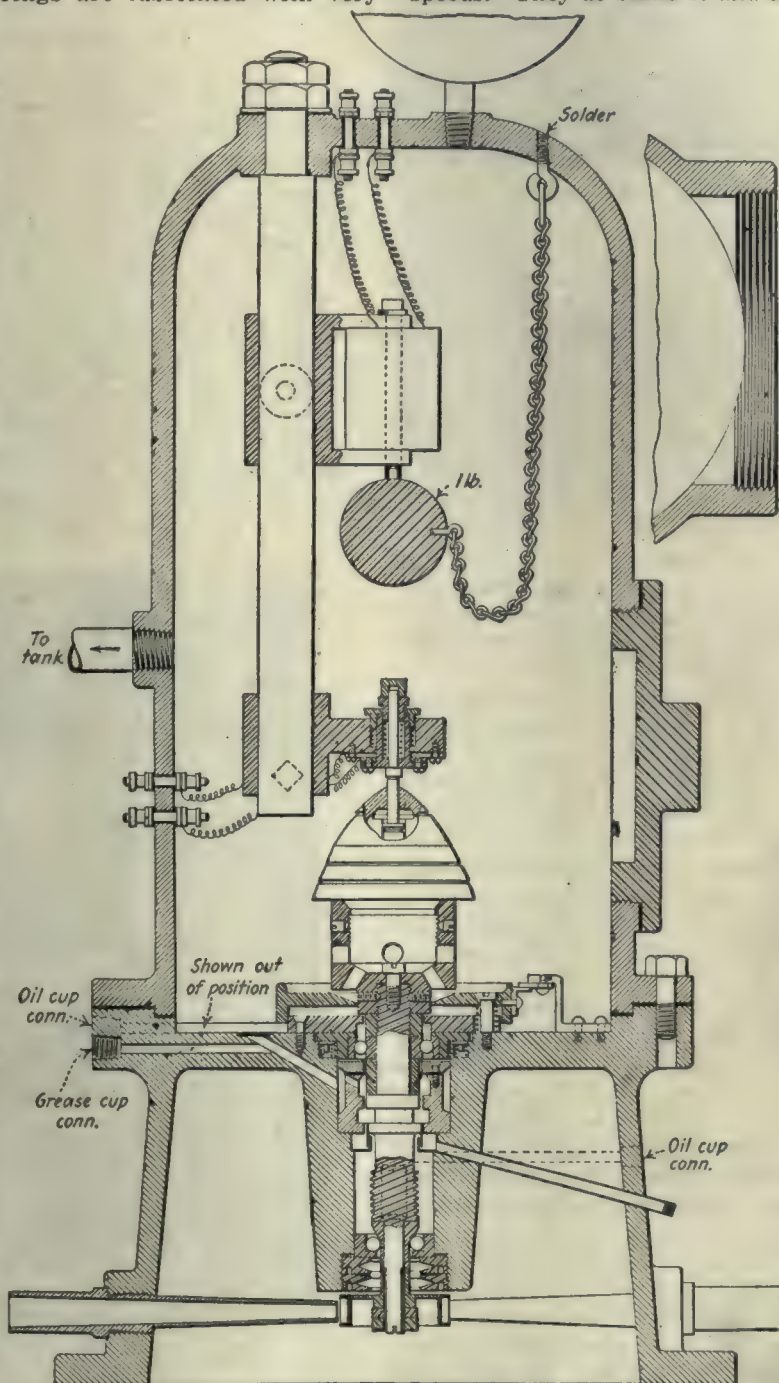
DETAILS OF MACHINE FOR TESTING BURNING TIME OF FUSES
